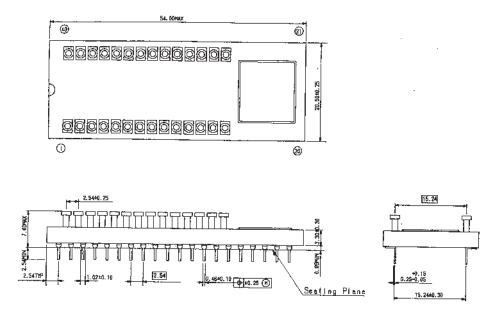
MSM85C154HVS pin layout and external dimensions
